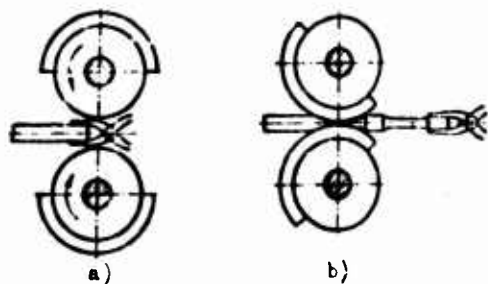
Diagram of stamping in rollers: a) initial position; b) operating position.
